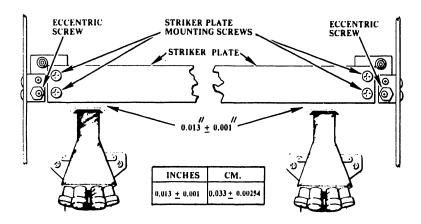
STRIKER PLATE ADJUSTMENT
